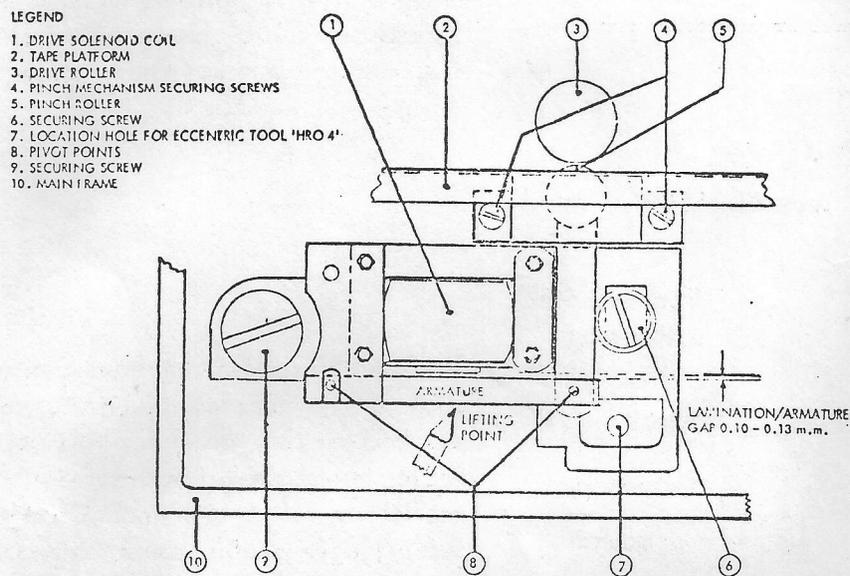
Drive Solenoid - Component Location/Adjustment
